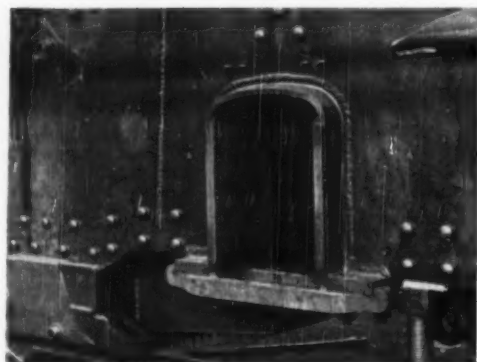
WELDED AXLE-BOX GUIDES, WEST COUNTRY CLASS ENGINE
